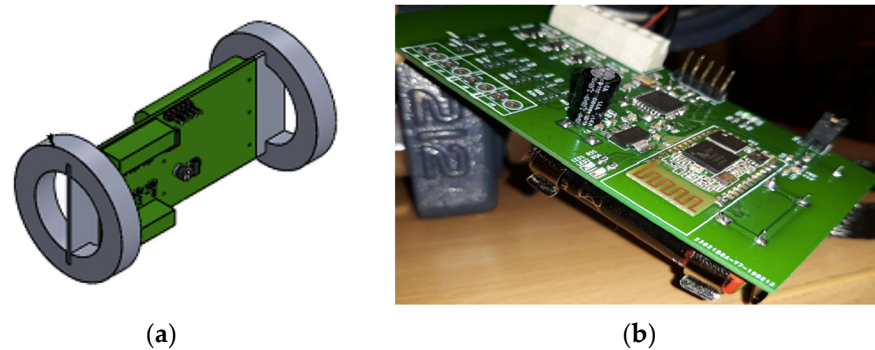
Details of the built-in electronic system: (a) a drawing of the PCB holder placed inside the tail pulley; (b) the printed circuit ready to be mounted into the pulley.
